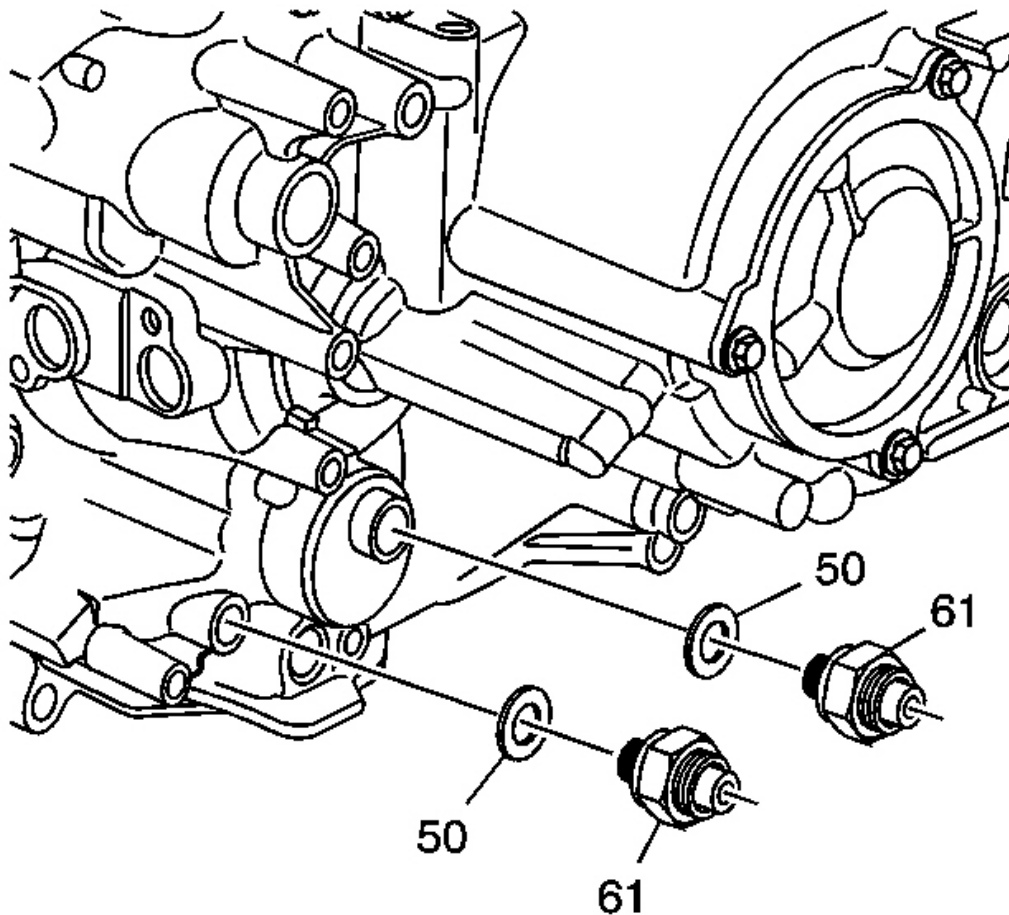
Transaxle Fluid Cooler Pipe Fitting & Sealing Washers
